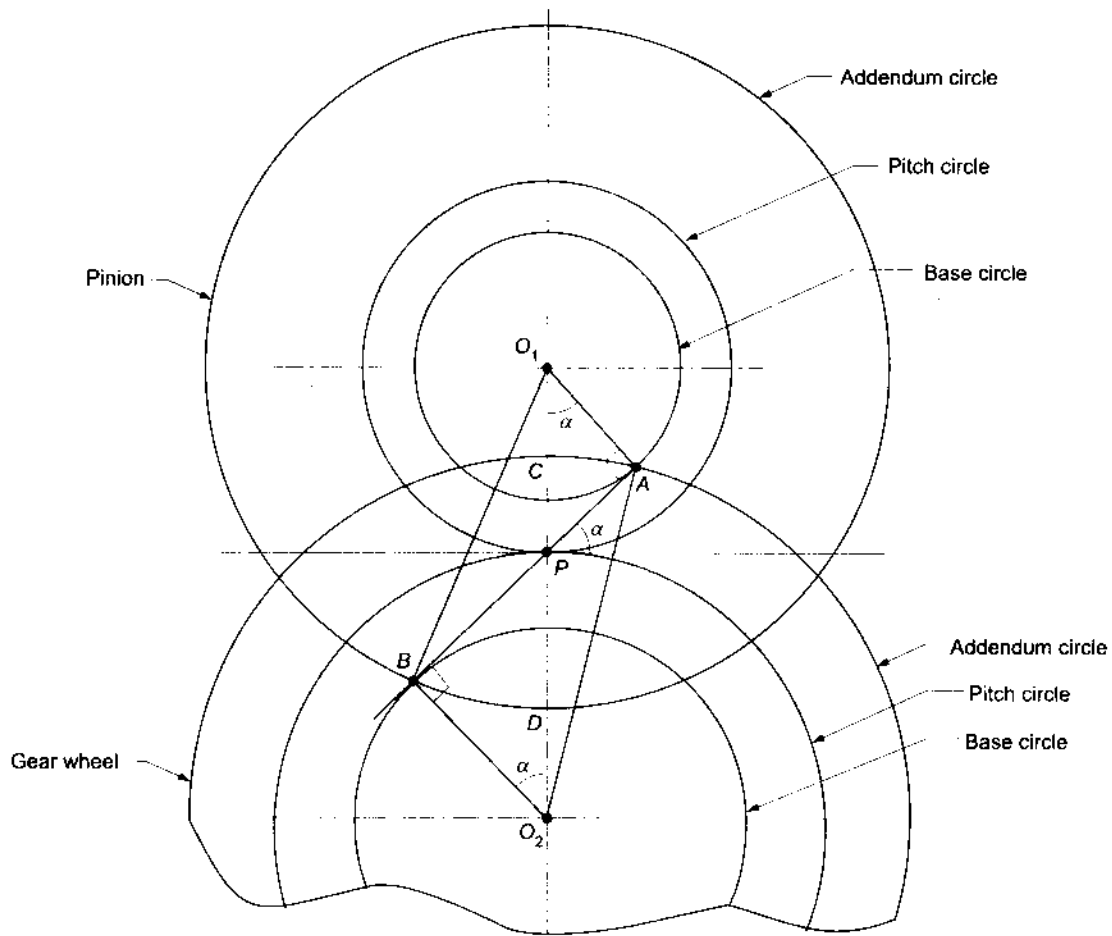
Calculating minimum number of teeth on pinion and gear wheel
